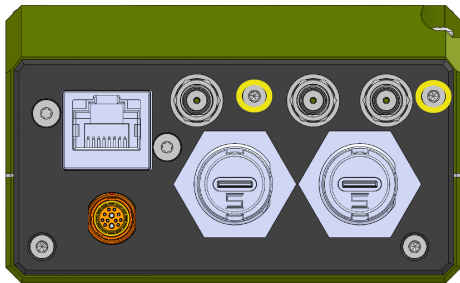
EDGETAK face plate screws connected to enclosure top (see also [Figure 14](#))
